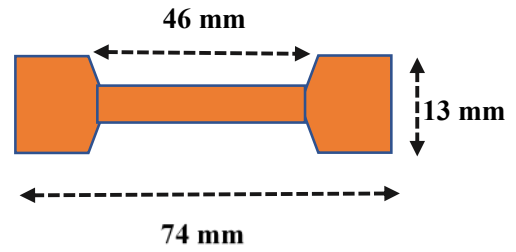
Shape and dimension of the dumbbell shaped test material to be moulded.
